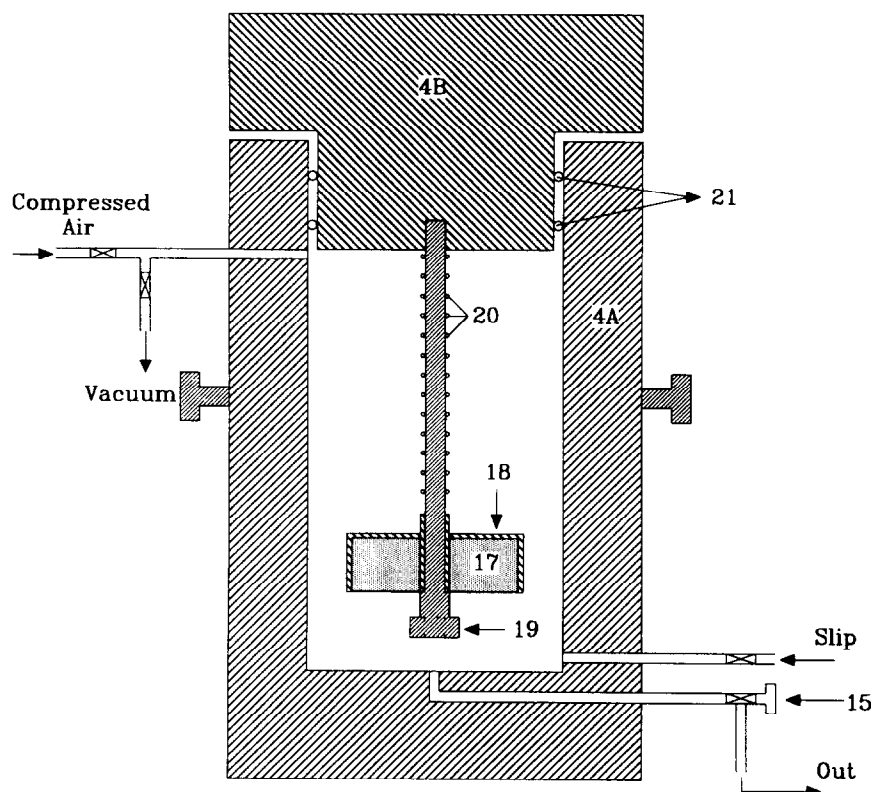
Schematic of pressure chamber: (4A) pressure chamber body; (4B) pressure chamber lid; (17) plaster mould; (18) stainless steel capsule; (19) supporting screw; (20) helicoidal spring; (21) O-rings.
